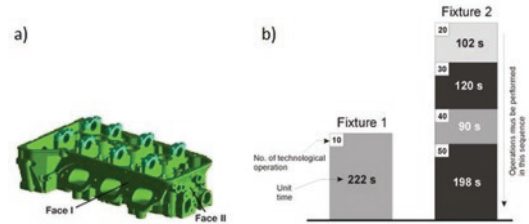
Engine part : a) general schematic view of the product, b) structure of the technological process [28].
